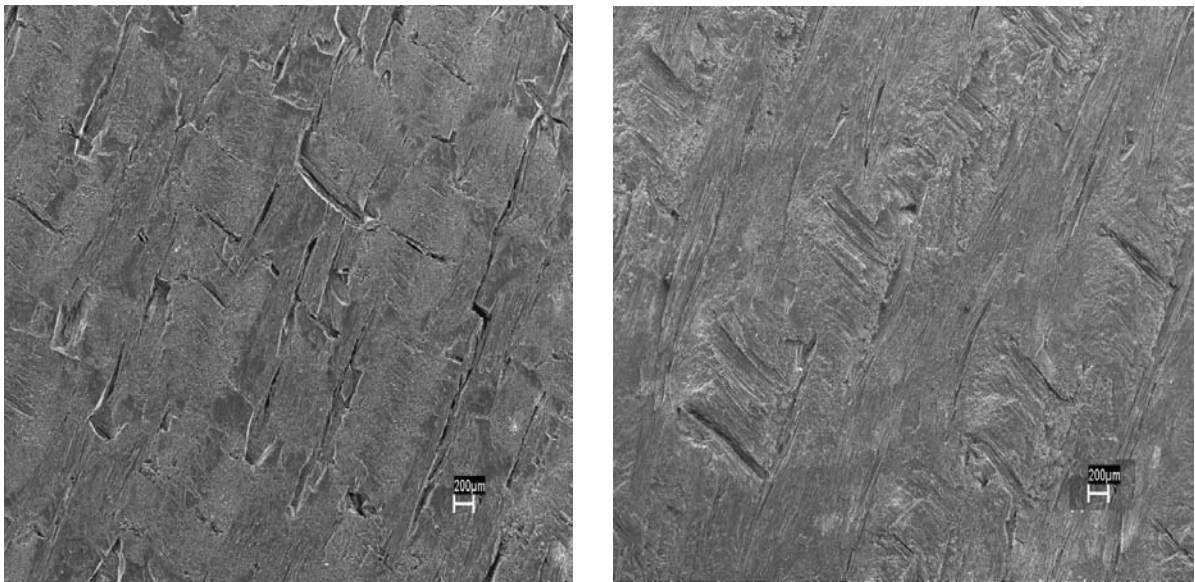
Composite machined surface: a) using uncoated tool, b) using diamond coated tool
